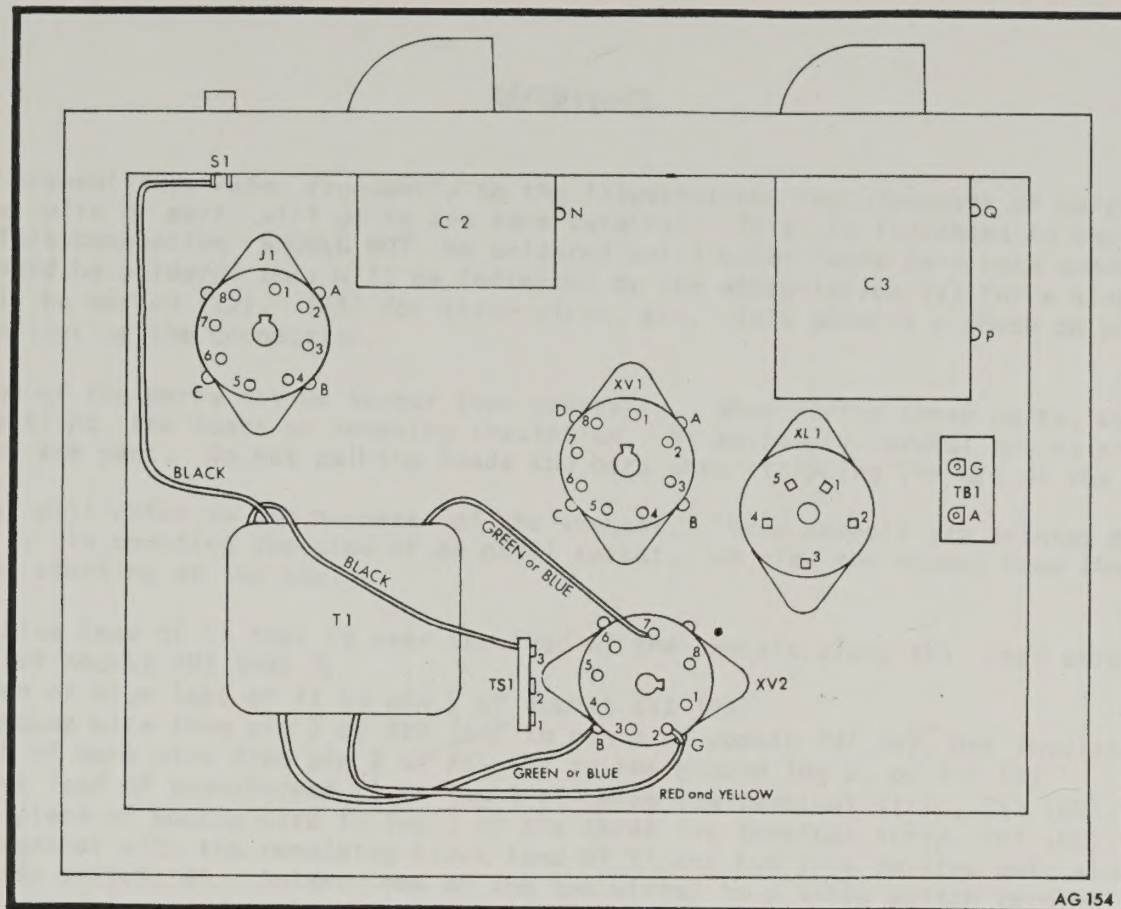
OUTLINE DRAWING - BOTTOM VIEW
